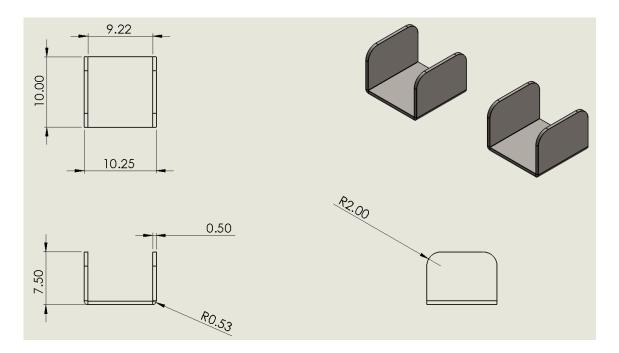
Drawing of the Crossbeam Pocket, with dimensions in inches.
